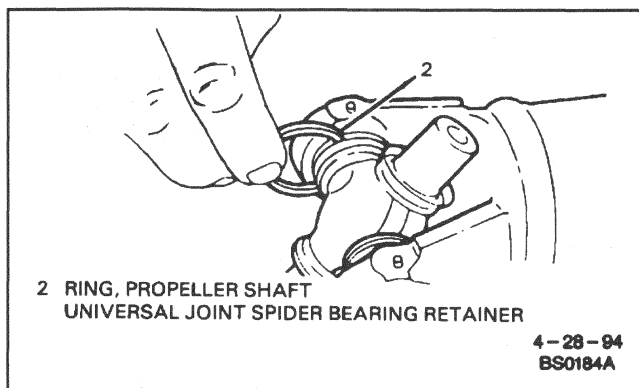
Installing Propeller Shaft Universal Joint Spider Bearing Retainer Ring
